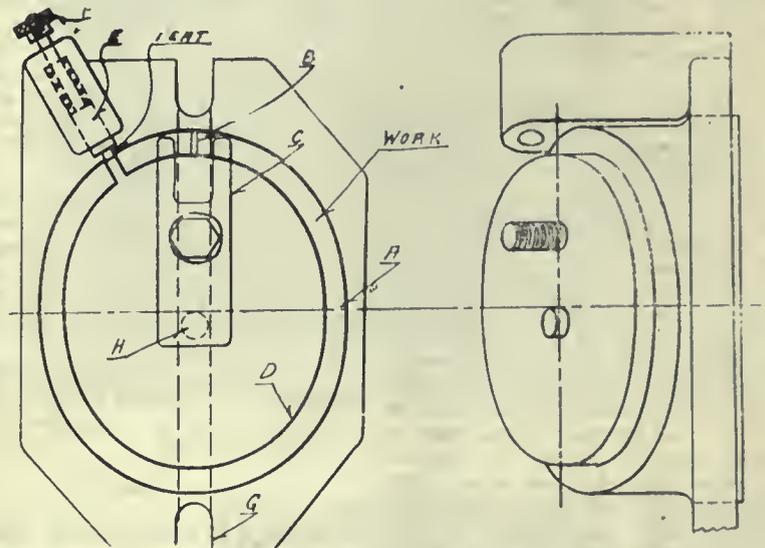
FIXTURE FOR SAWING SHOES APART.
